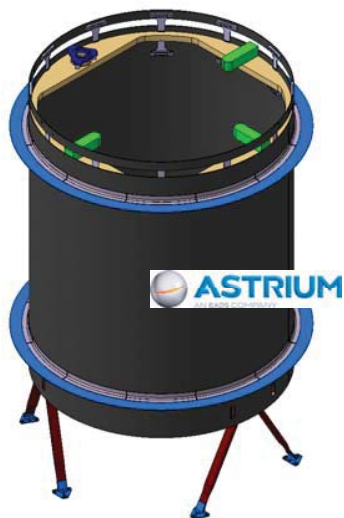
Cylinder design concept of the LISA Telescope Assembly Breadboard
